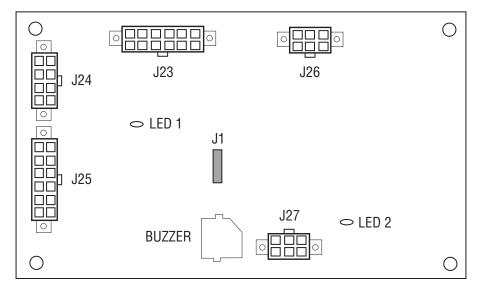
P.F.C. CONTROL BOARD PLUGS
